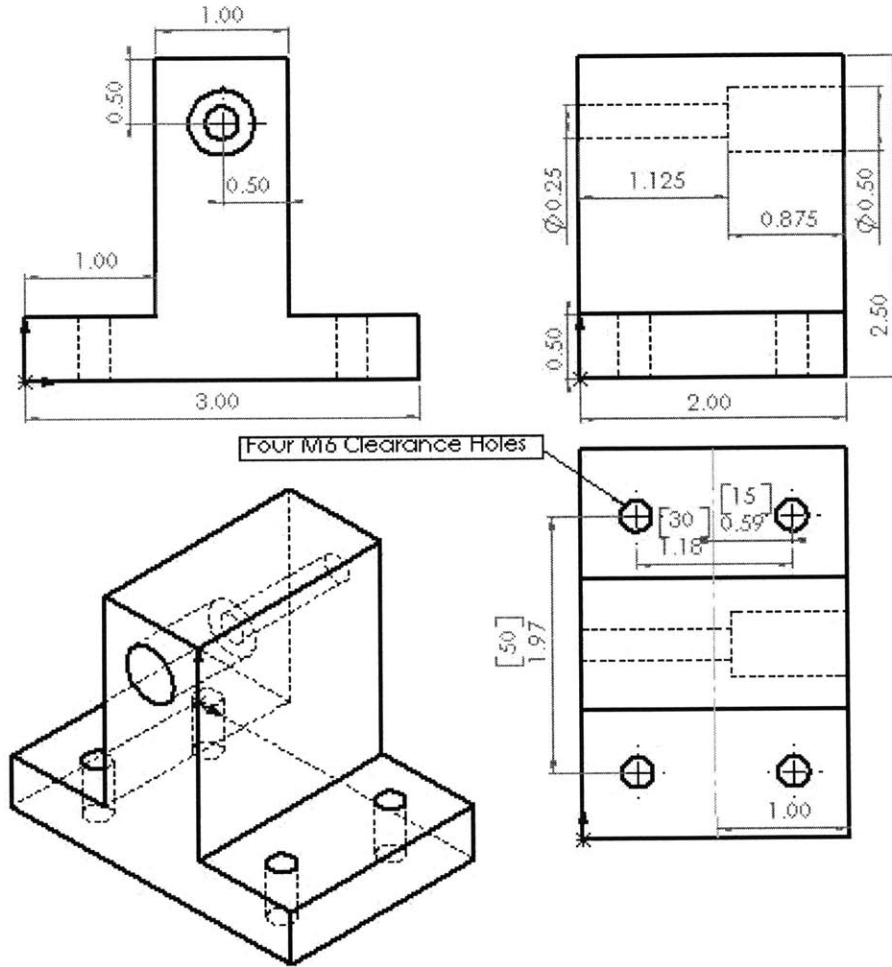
Dimensions of the mount for the cantilever beam used in the magnet-across-coils system.
